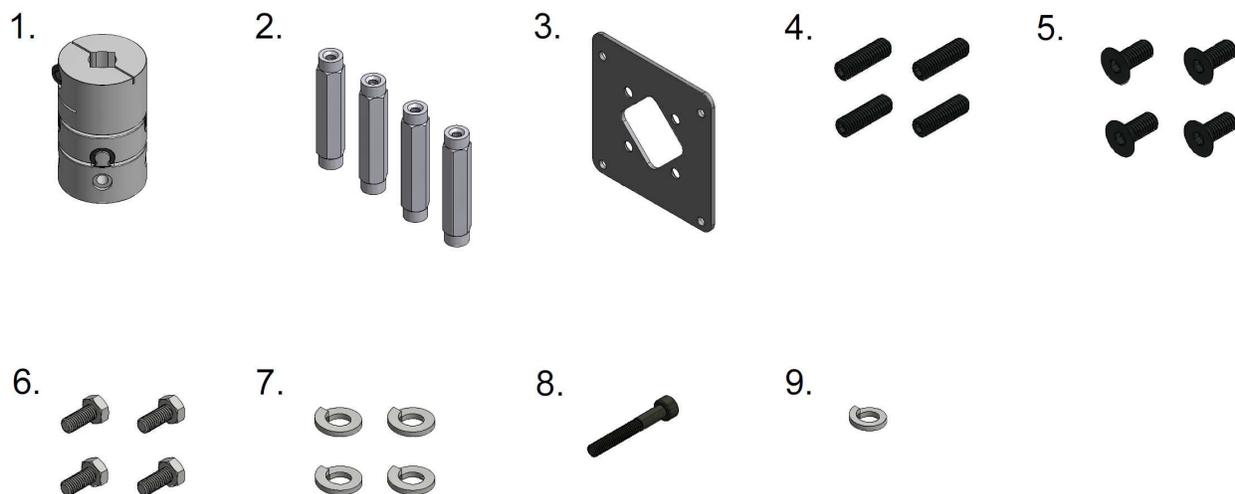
Pieces Supplied with the AGA93.2 Bracket Kit
